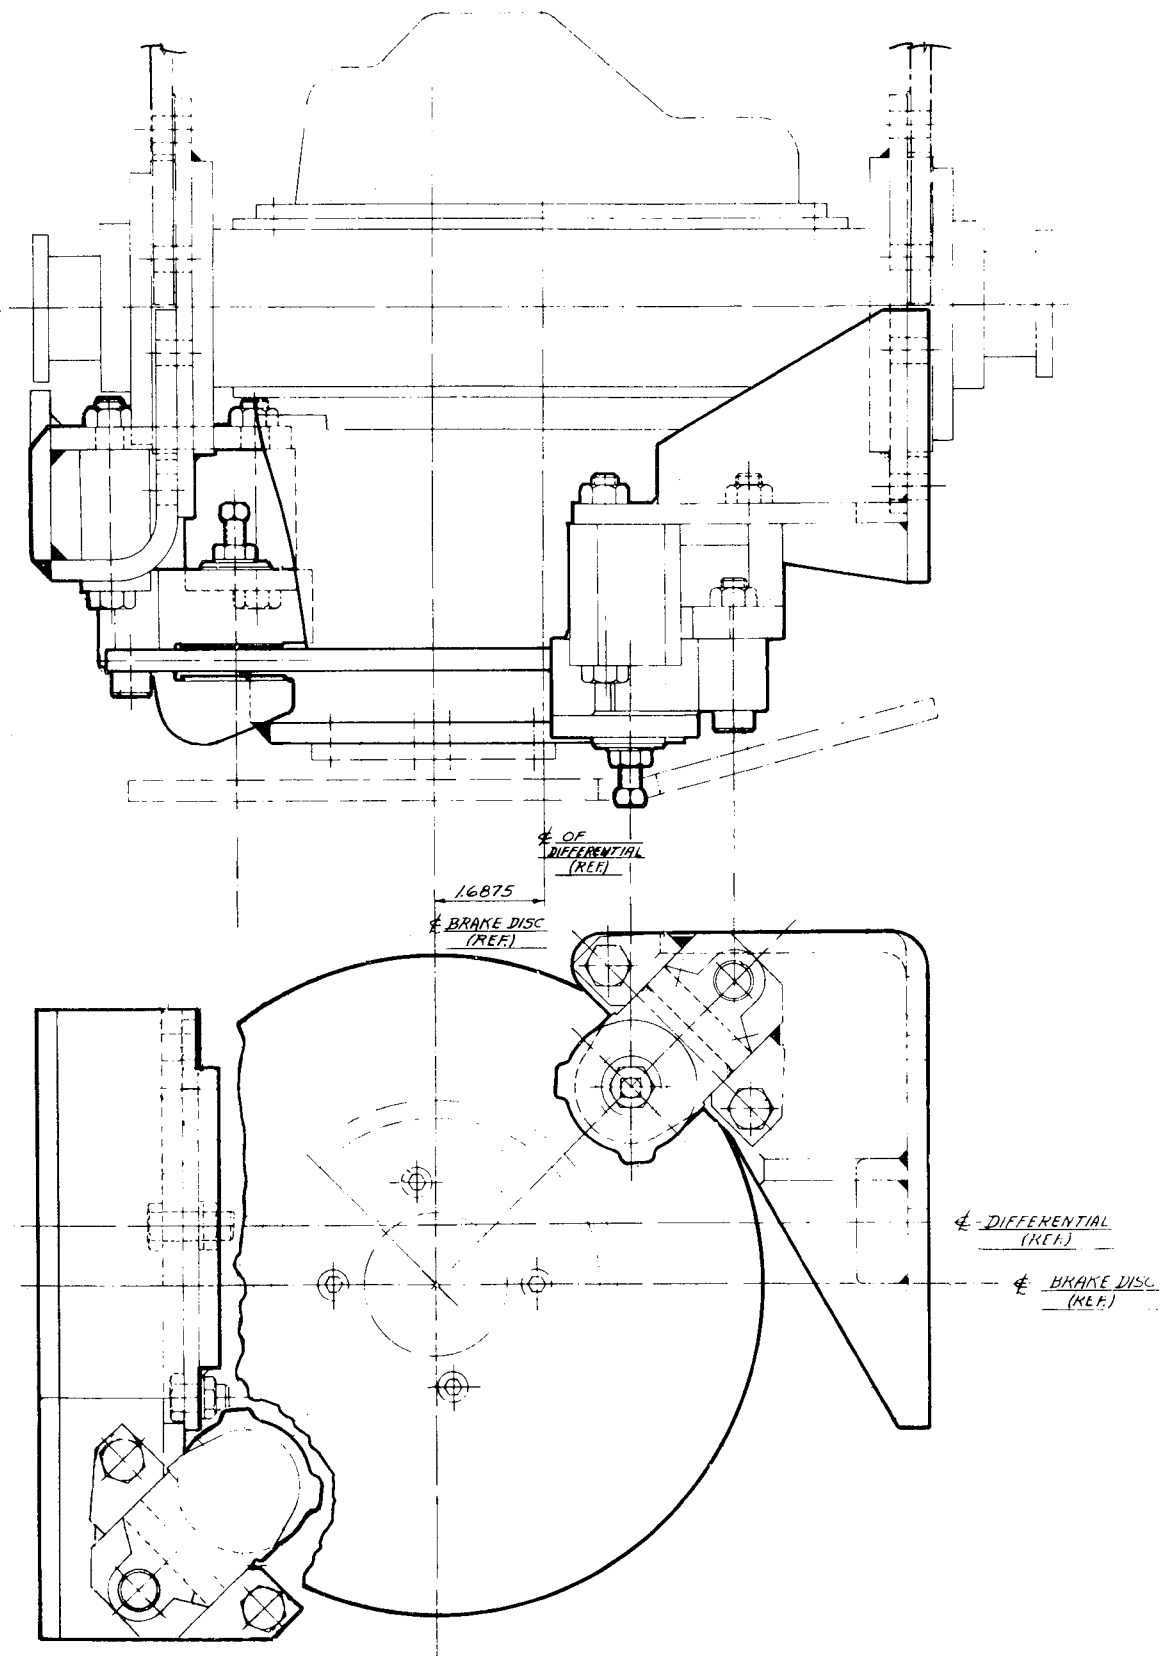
PARKING BRAKE ASSEMBLY (ORIGINAL DESIGN)
